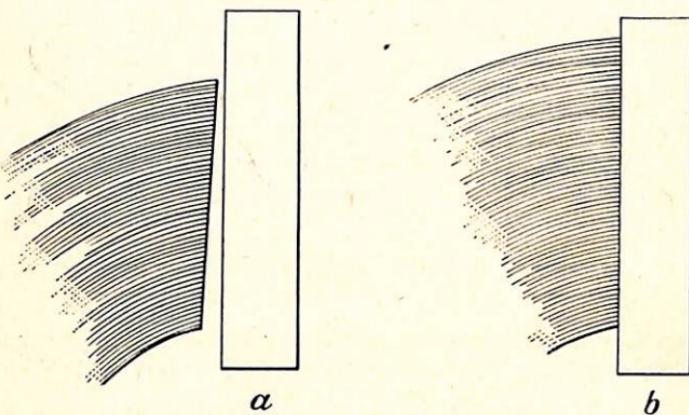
Brush contact. (a) before making, showing angle of rake; (b) after spreading
